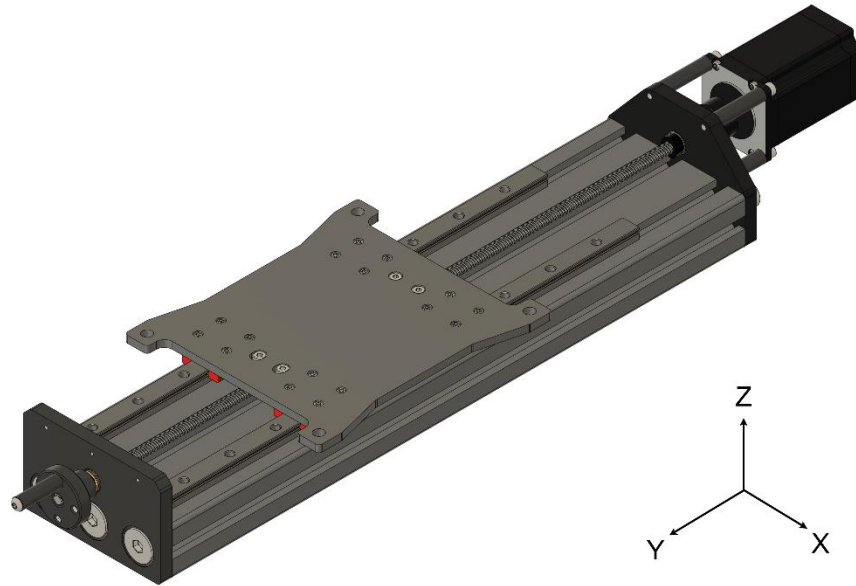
Y axis assembly, linear rails, Y gantry plate, stepper motor assembly on the back with all the bearings and front plate plus jog wheel.
